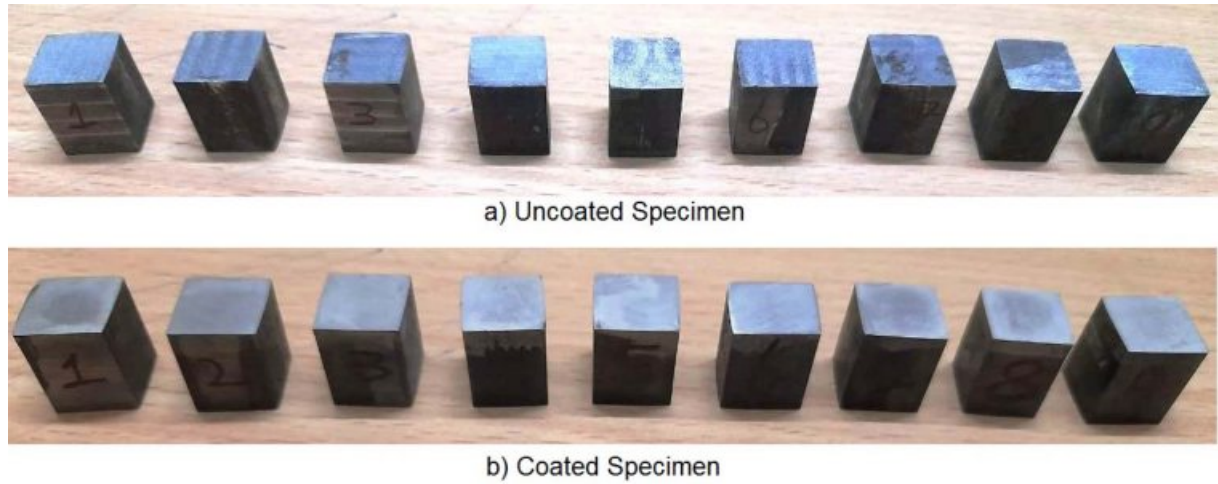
Inconel 617 specimen a) Before coating and b) After Coating.
